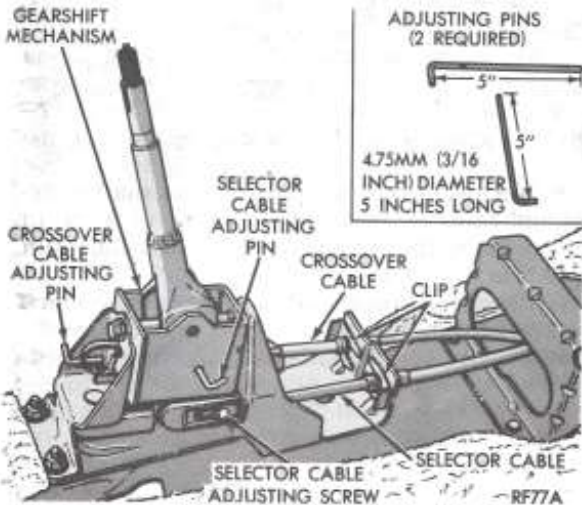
Make Cable Adjusting Pins (2) as Shown (K,P-Bodies)
